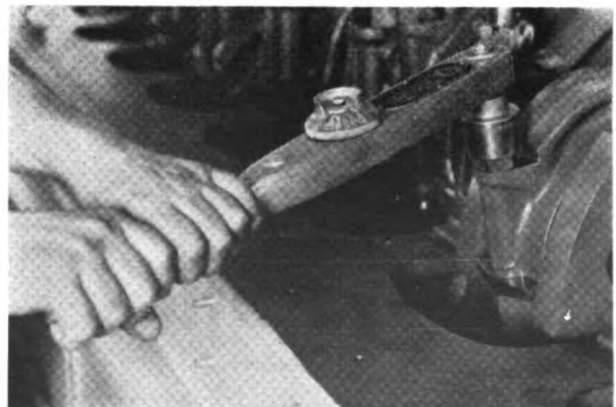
Use of torque wrench to tighten connecting rod bolt nuts.
